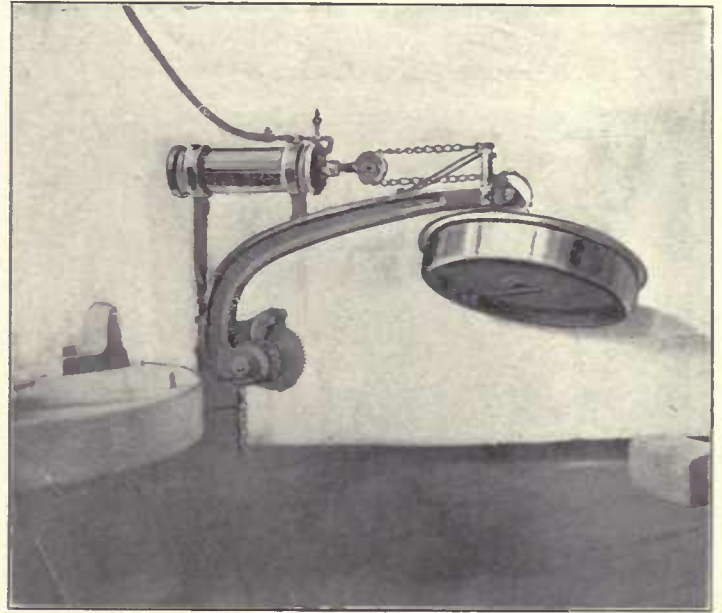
Air Hoist for Car Wheel Boring Mill.
